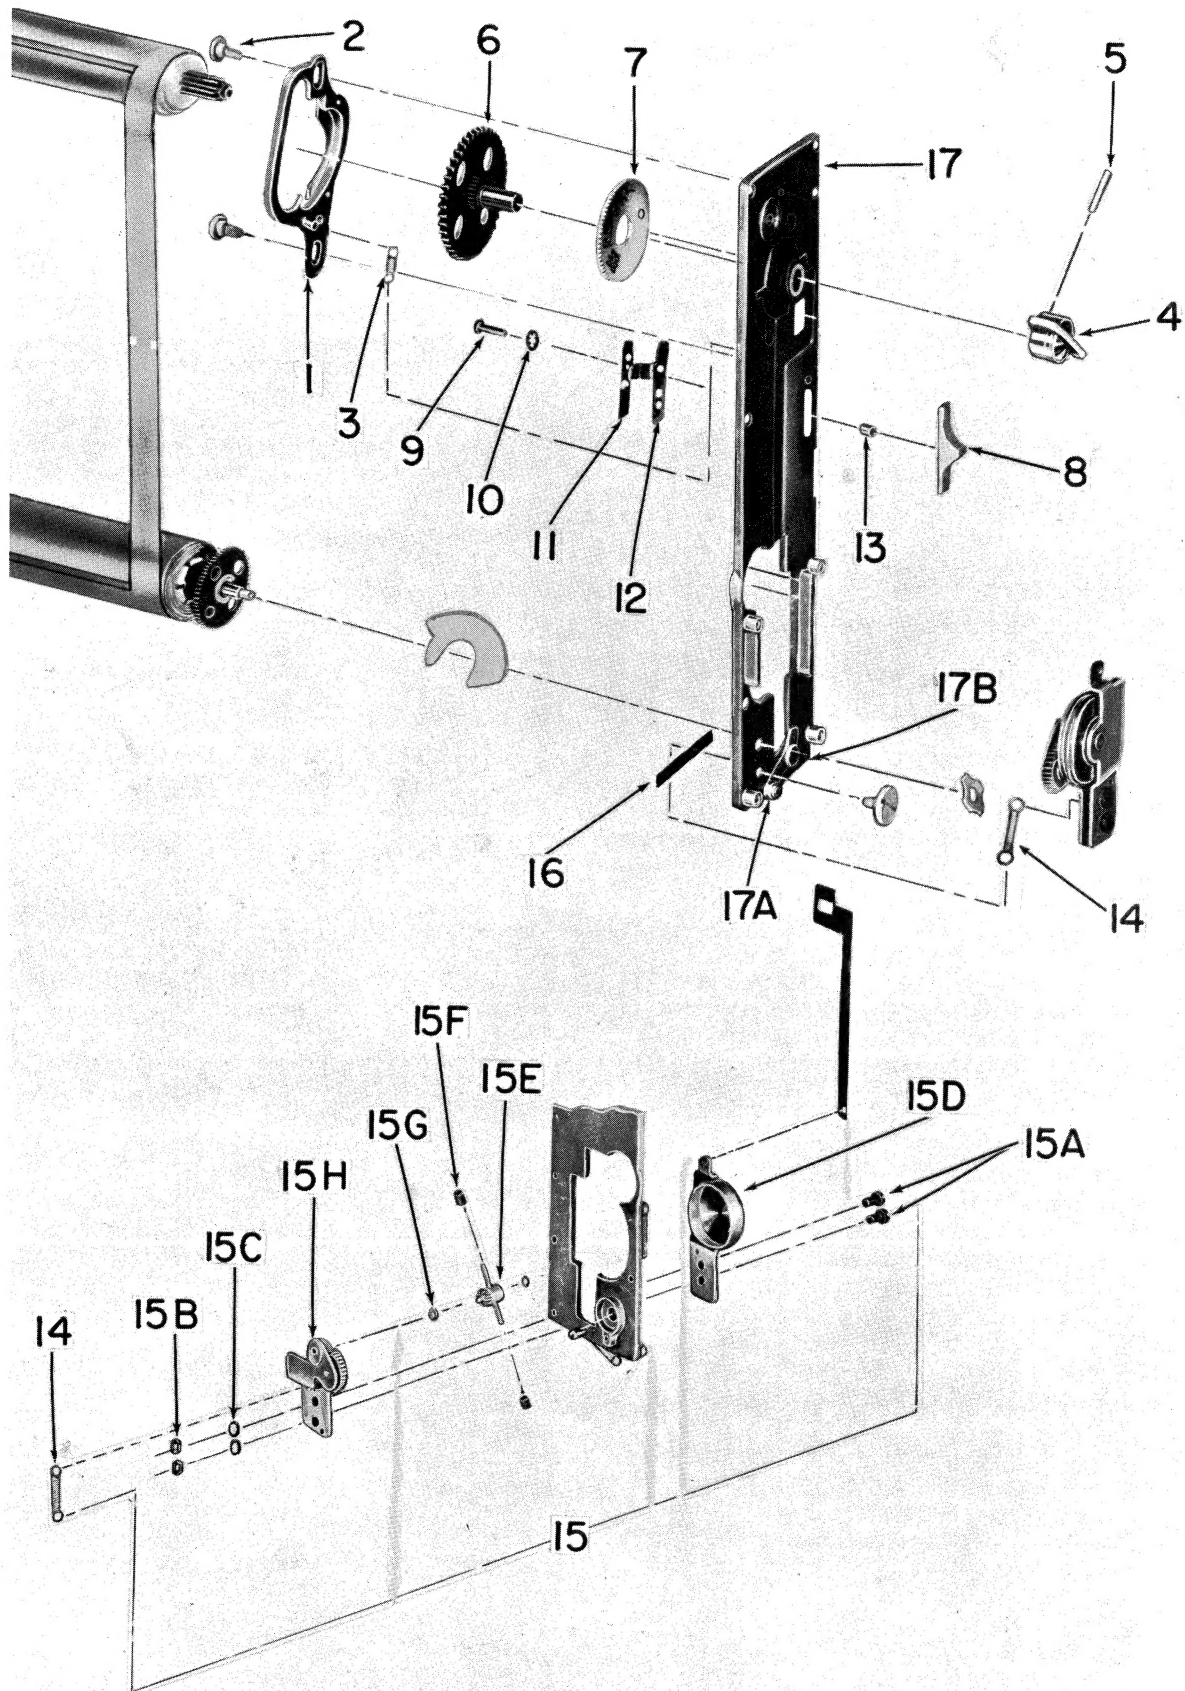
Shutter Mechanism Plate Assembly, Exploded View
